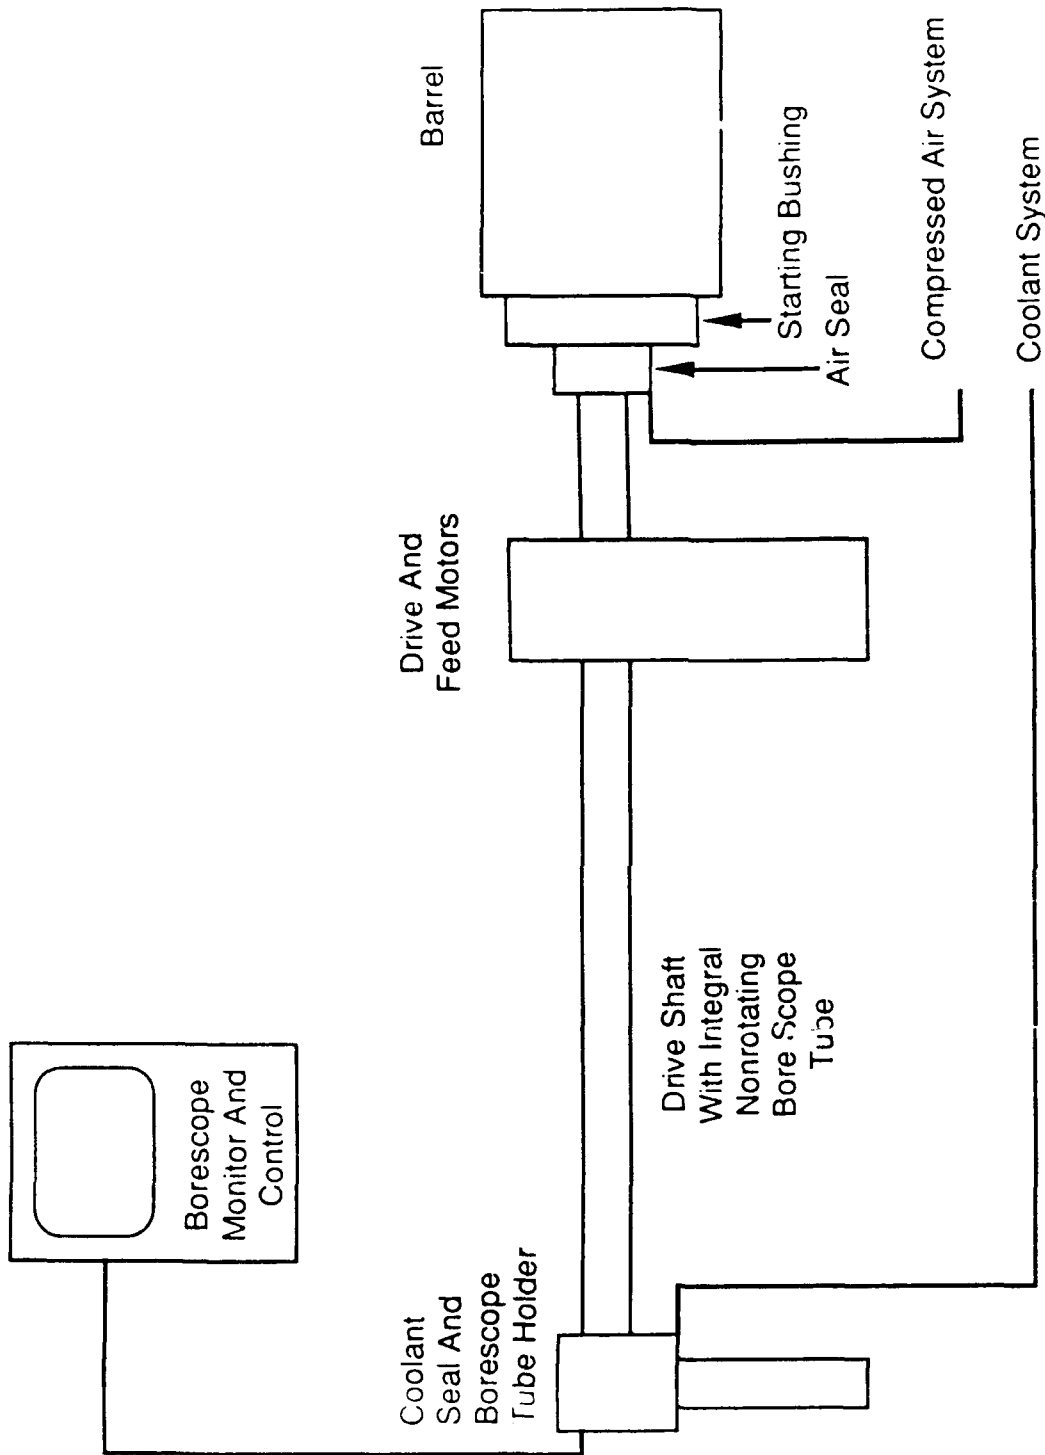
Schematic of proposed bore reaming assembly external to bore for either muzzle or breech indexed machining.
